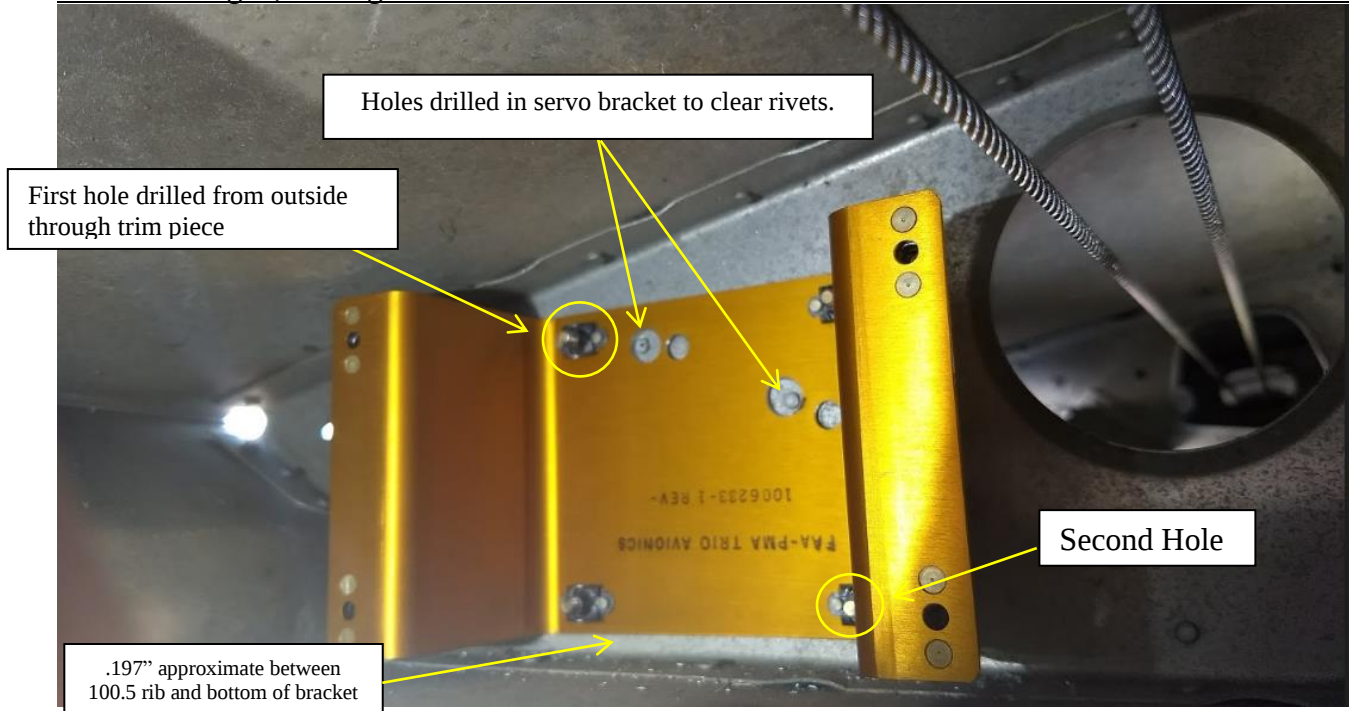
ROLL SERVO BRACKET ASSEMBLY AT FS 100.5
